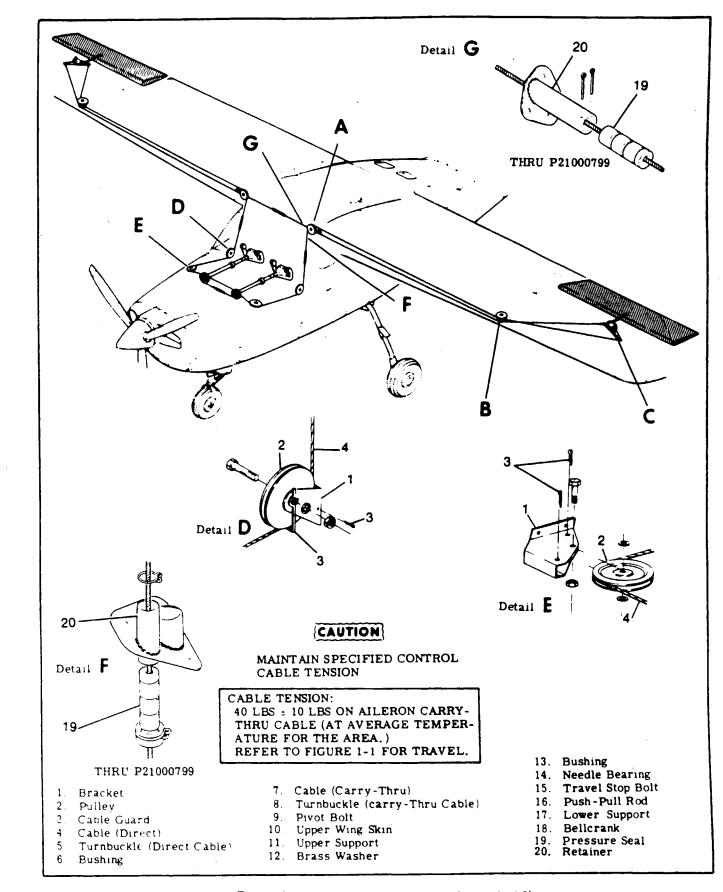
Aileron Control System (Sheet 1 of 2)
